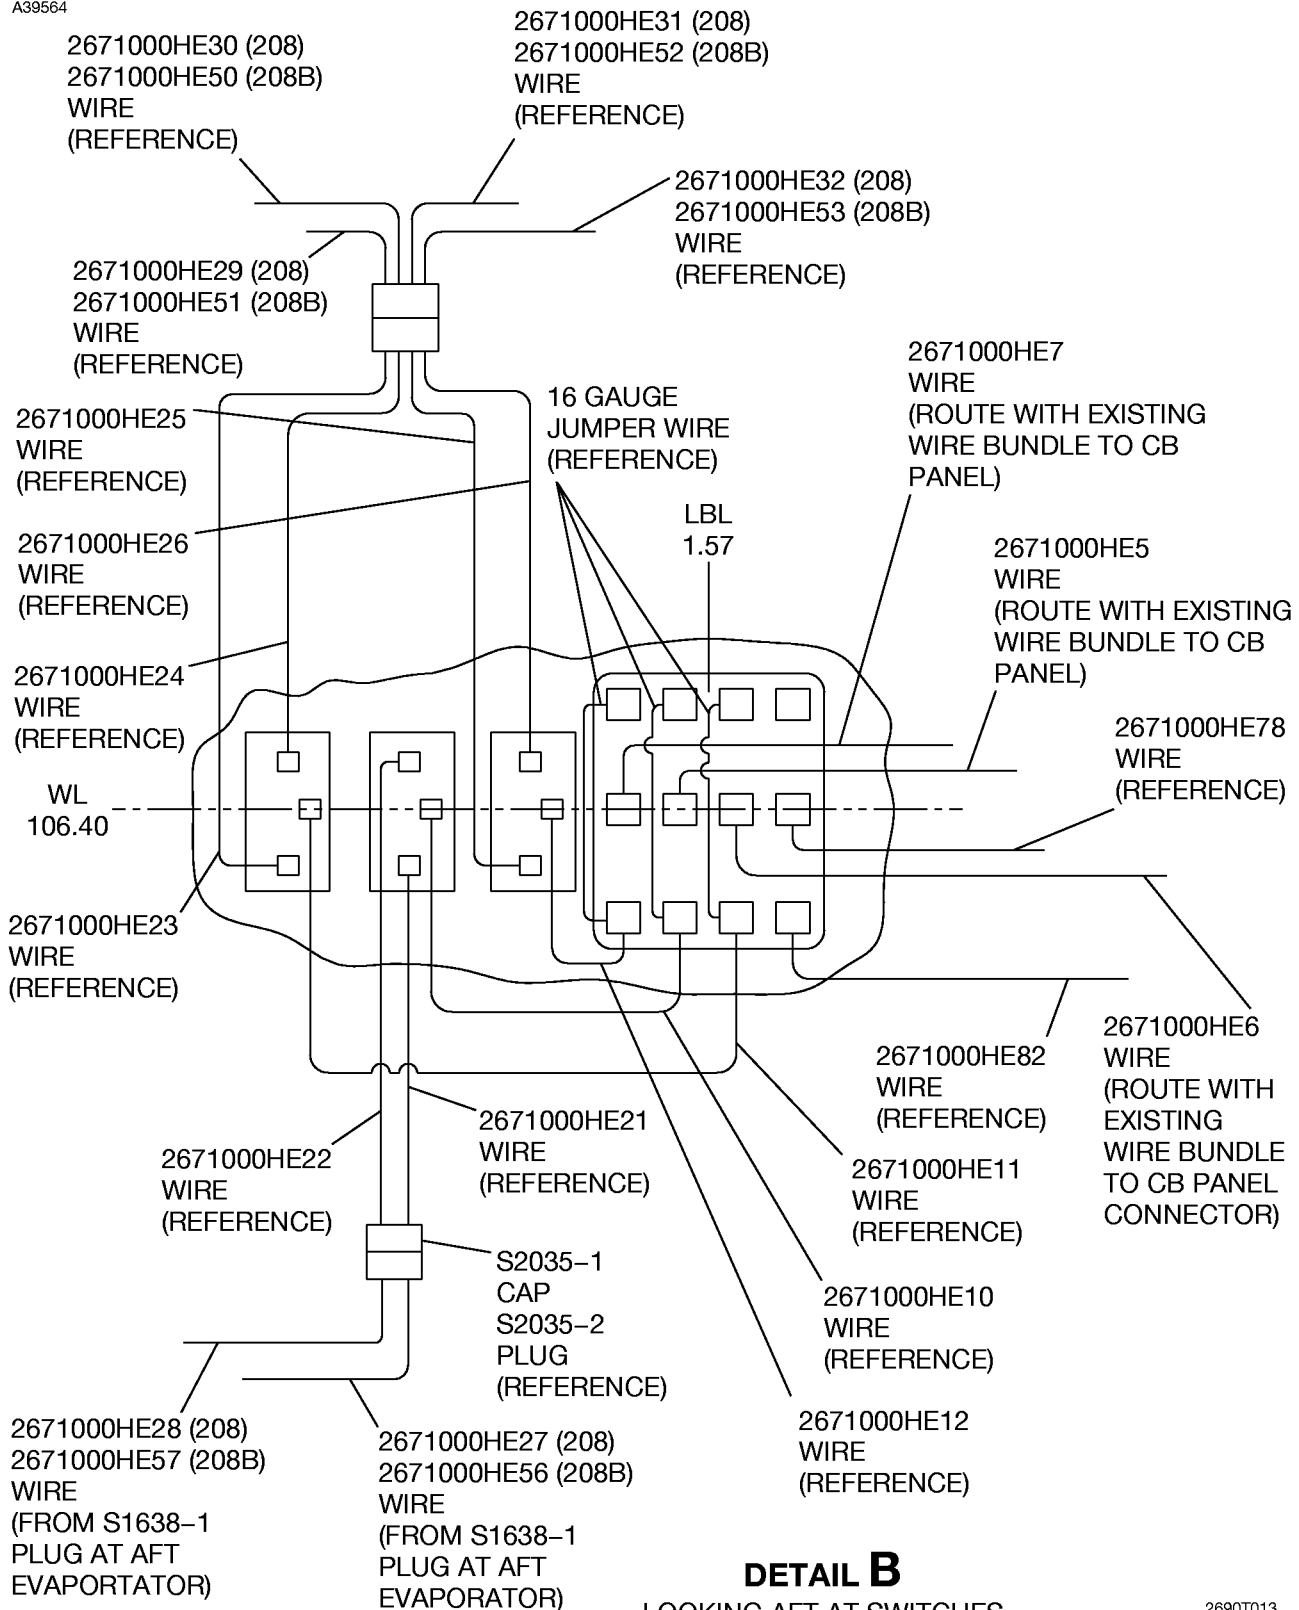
Instrument Panel Switch and Placard Installation (Sheet 1)
